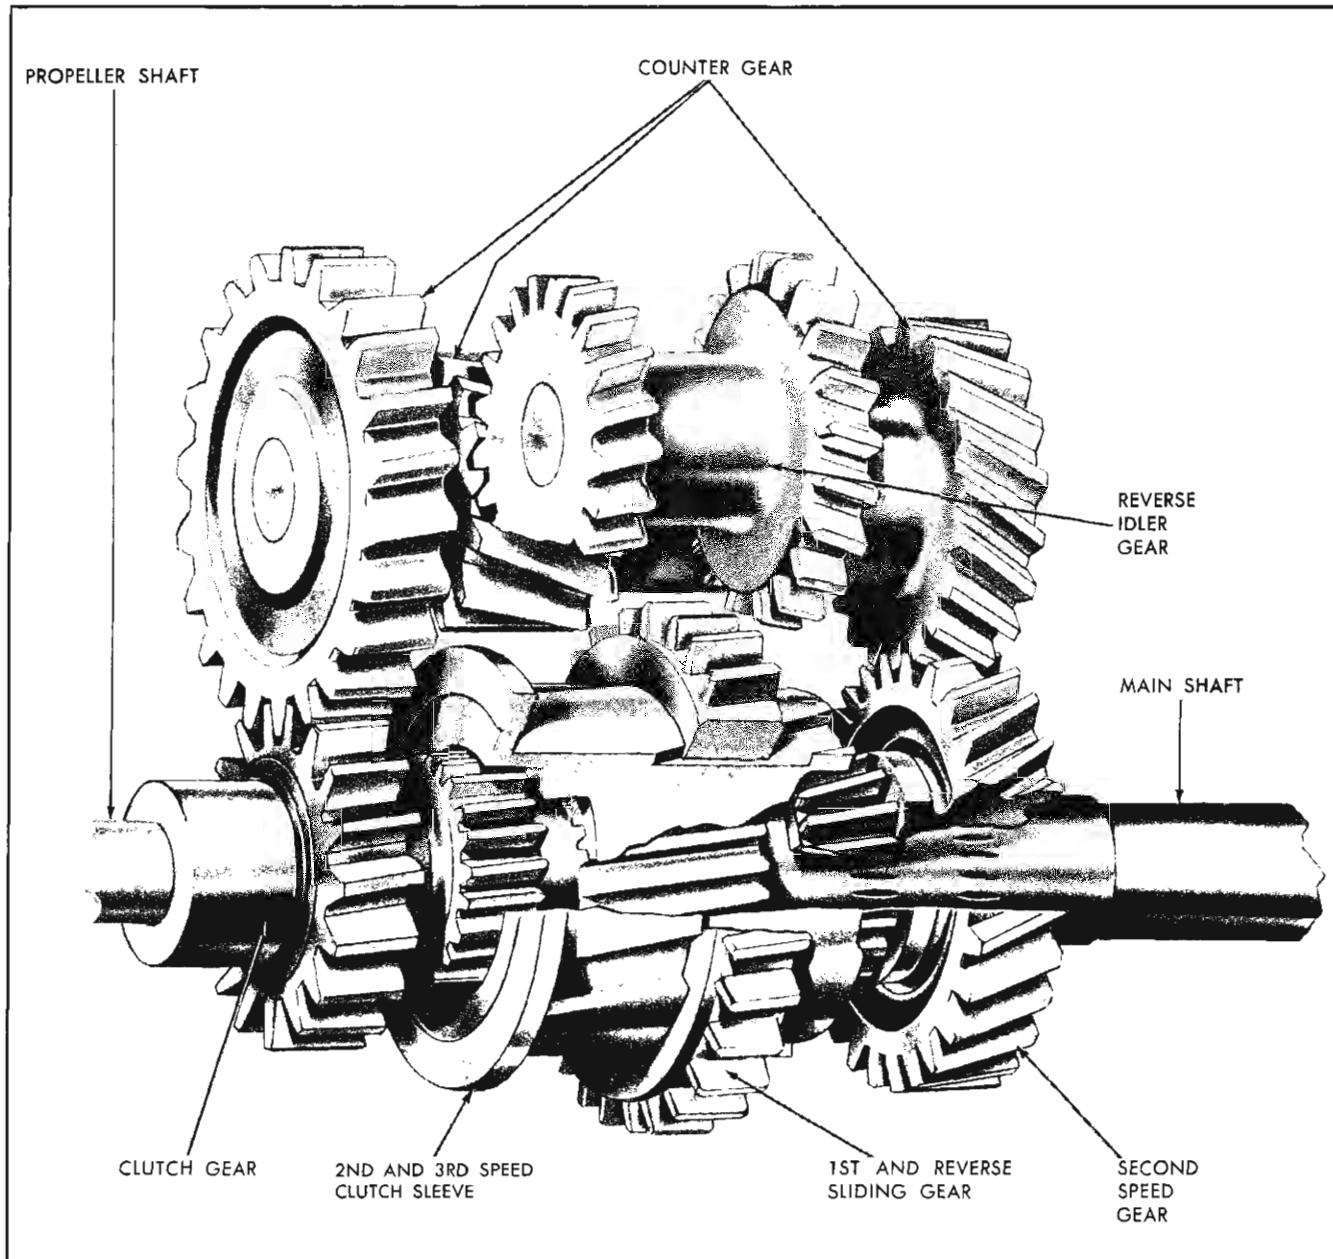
Cut-away of Synchro-Mesh Transmission Gears (Viewed through top of case)
